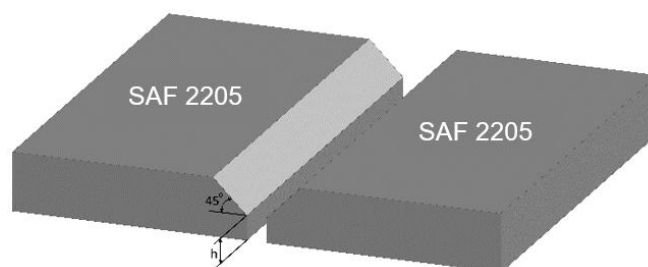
Preparation of plates for welding (h: 1 mm, the gap between the plates at weld root: 2 mm).
